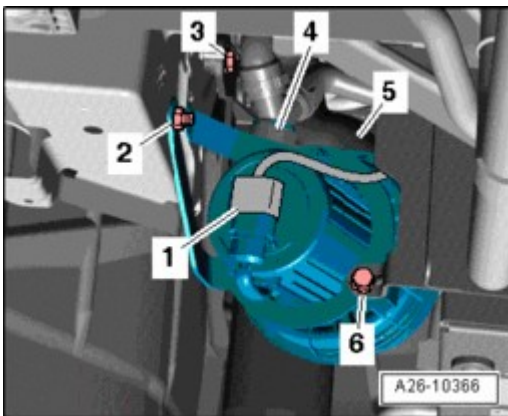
Identifying Electrical Connector, Air Guide Hoses, Nut/Bolts & Secondary Air Injection Pump
